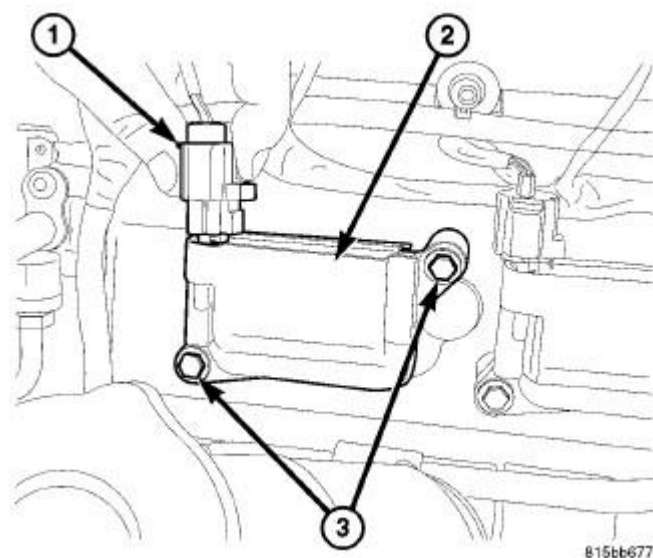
Ignition Coil Connector, Ignition Coil & Mounting Bolts
